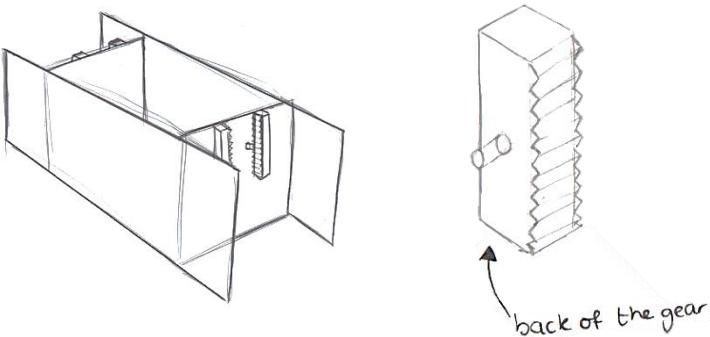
, CONNECTION OF THE GEARS ON THE INNER BOX
